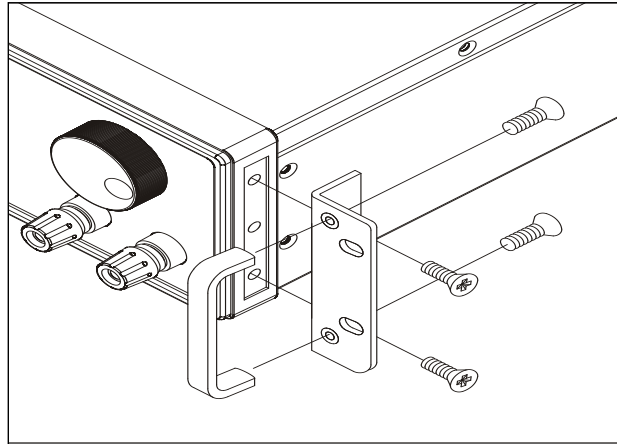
Installing the Rack Mounting Kit & Handle of 62006P, 62012P & 62024P
